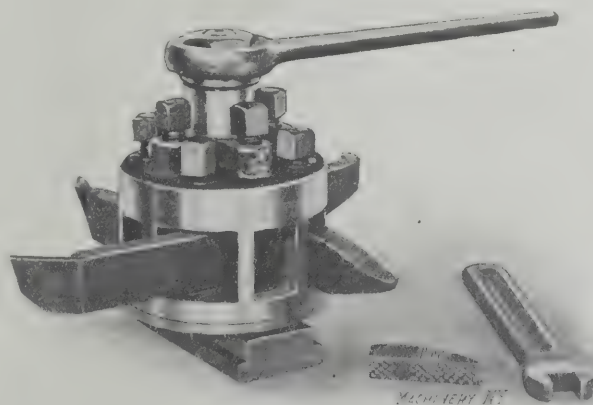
Brewer Multiple Tool-holder for the Engine Lathe
